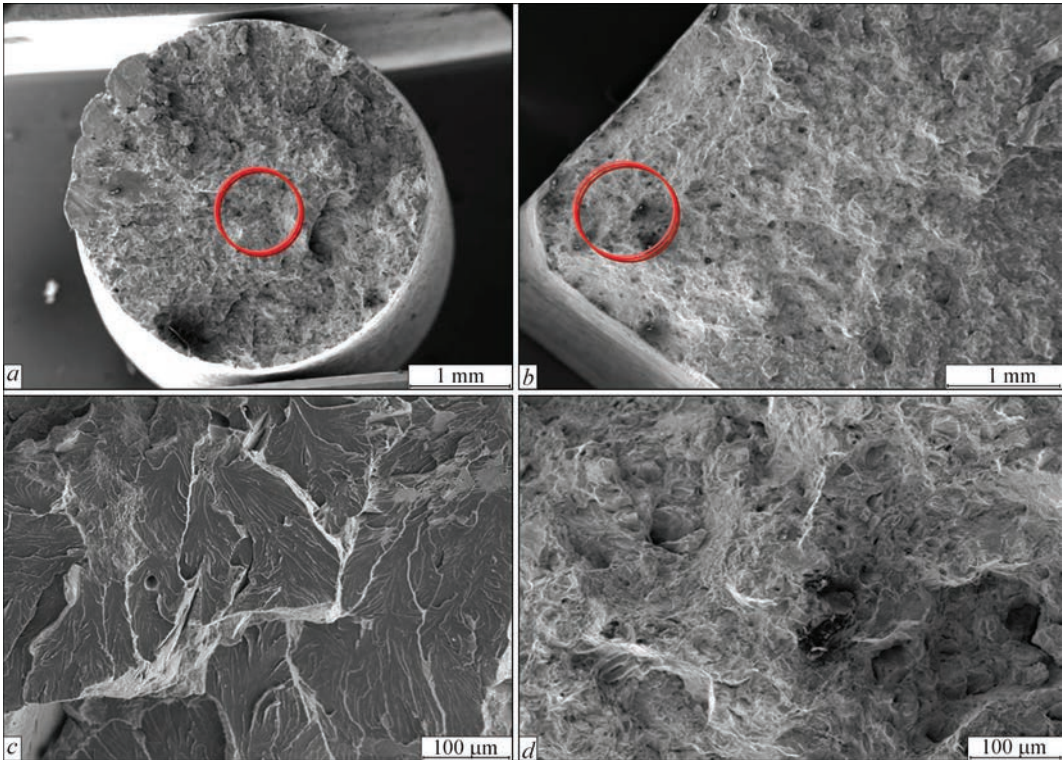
Macro- (*a, b*) and microfractograms (*c, d*) of welded joint fracture surfaces after mechanical tests of the cast (*a, c*) and deformed (*b, d*) ESR metal
